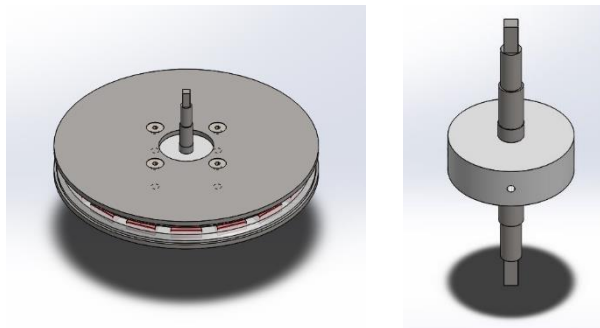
Assembled Alternator and Alternator Core Models in SolidWorks
